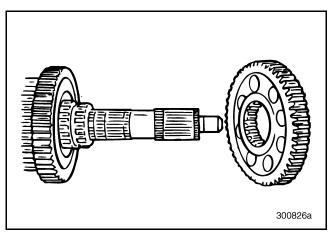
Removing Reverse Gear from Mainshaft (T313L/T318L Shown)
